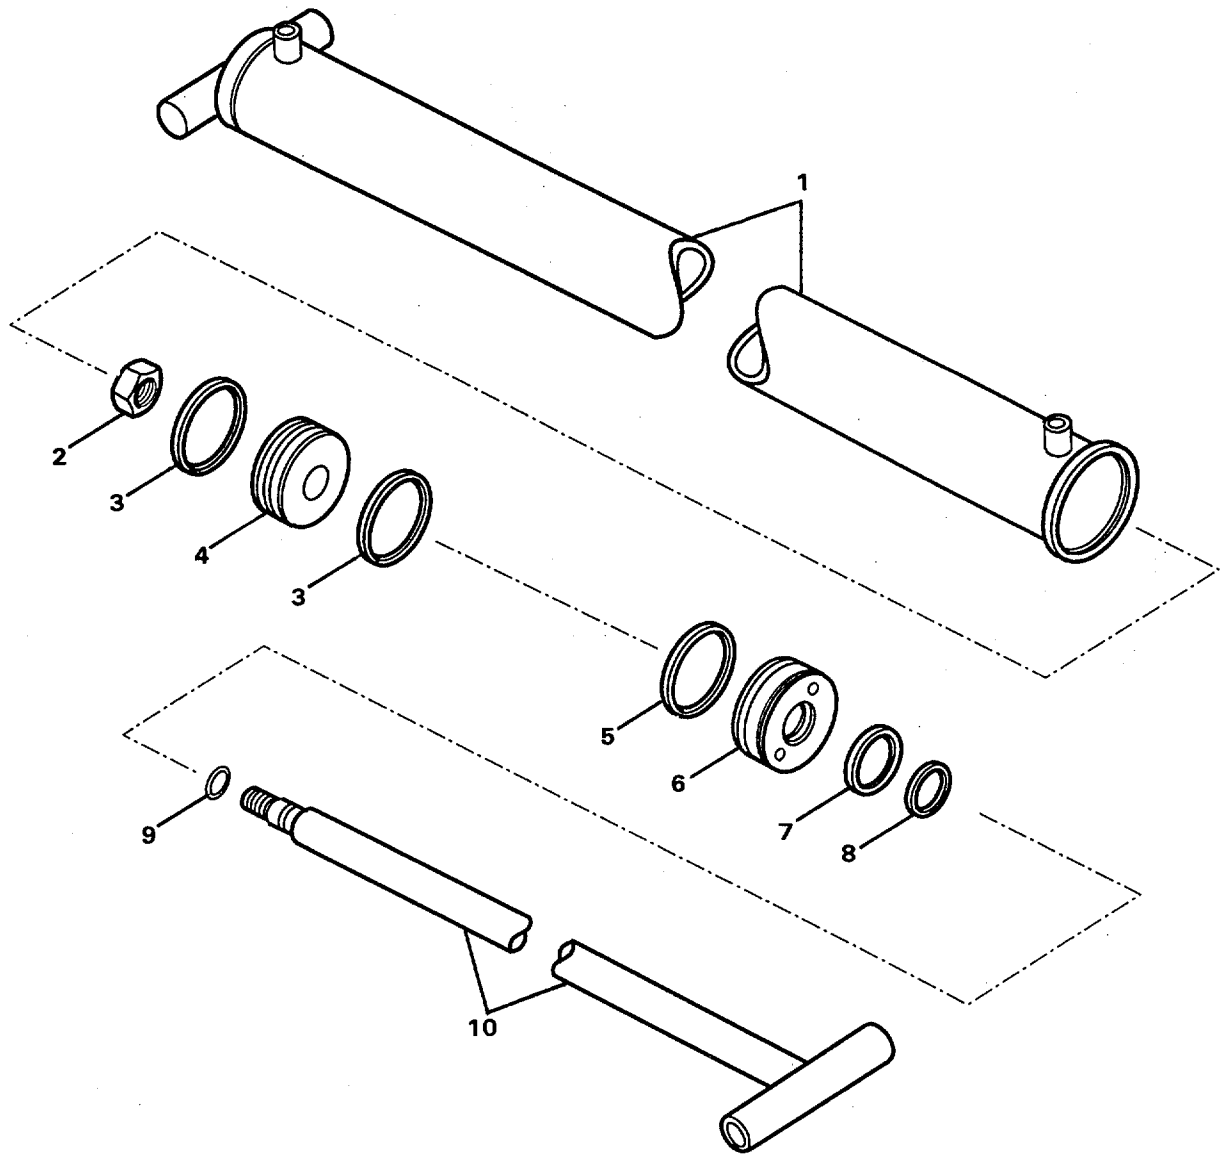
Outrigger Extend/Retract Hydraulic Cylinder
